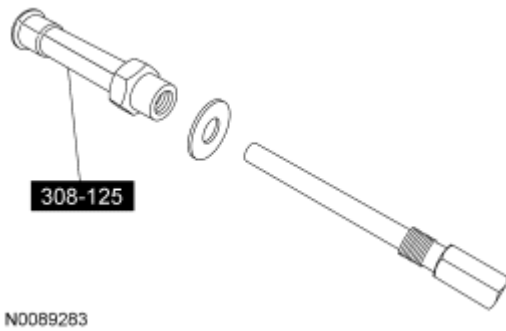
Placing Washer Between Components Of Bearing Cup Remover
